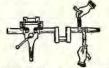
(left). Scored crankshaft bearing pin. Note the ridges. This is only a slight score.
